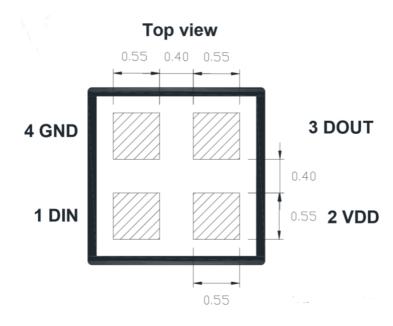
IN-PI15TAT5R5G5B Package Outline Dimensions
